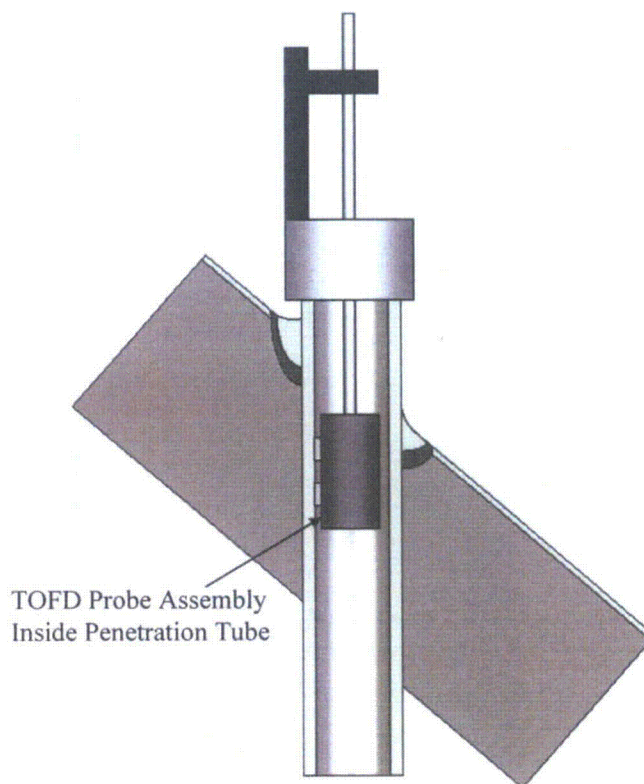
How the TOFD Assembly Fits in the Penetration Tube
